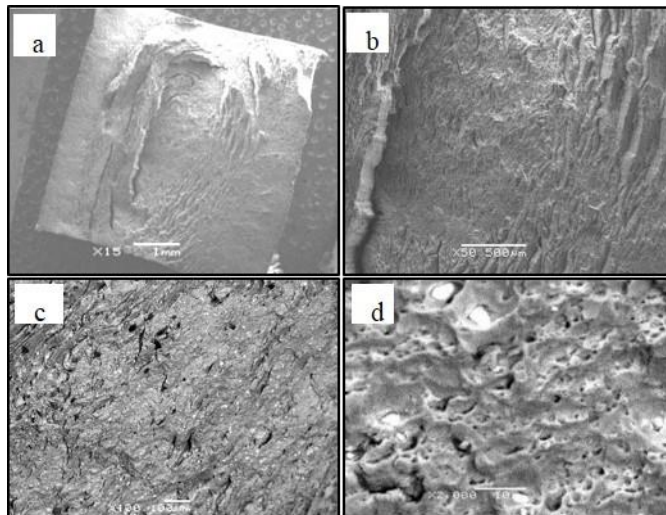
SEM micrographs showing the fracture surface of the tensile sample (billet temperature = 550°C, preheating time = 3 hours) extruded via flat-face die (S₇): (a) an overview of the fracture surface; (b) the small tears and cracks topography on the fracture surface, 50x, (c) 100x and, (d) fine equiaxed dimples, 2000x
